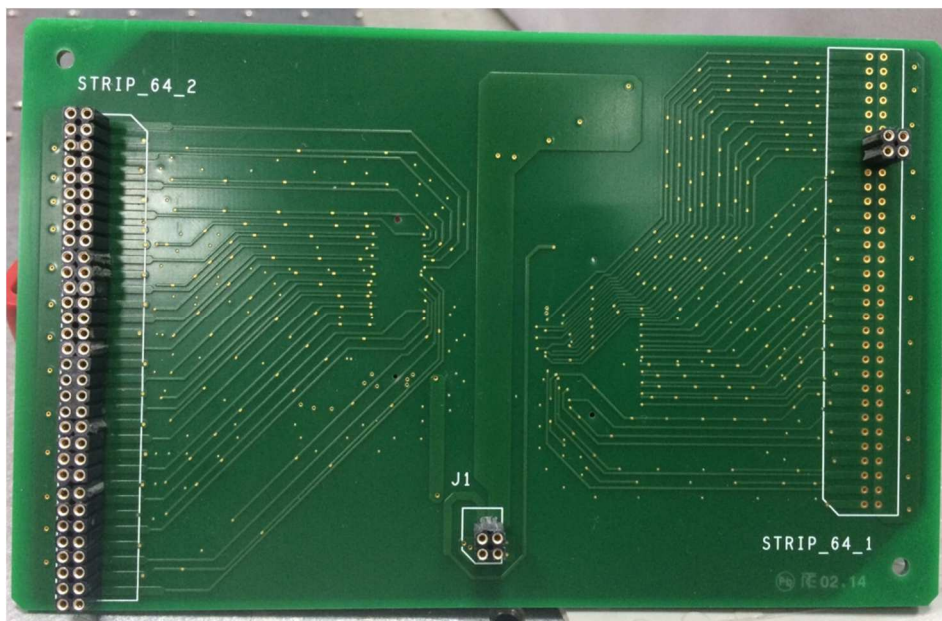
Bottom layer printed circuit of the realized adapter board.
